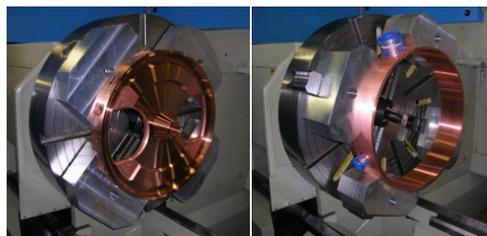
Machining of the discs and rings using aluminium clamping jaws.
